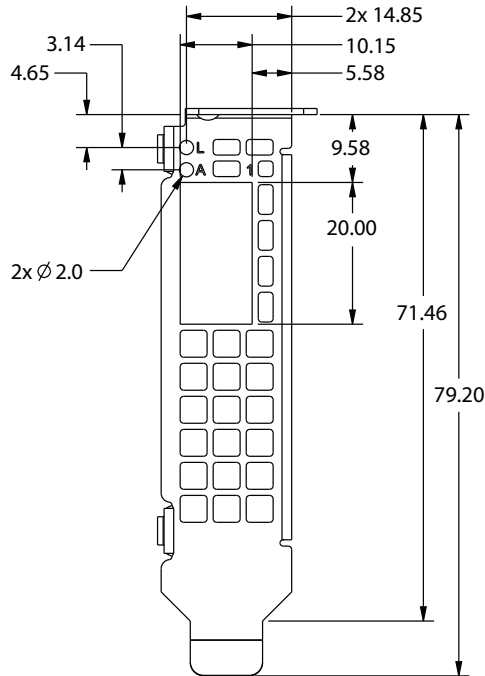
Standard-Profile Bracket Outline and Dimensions (in millimeters)
